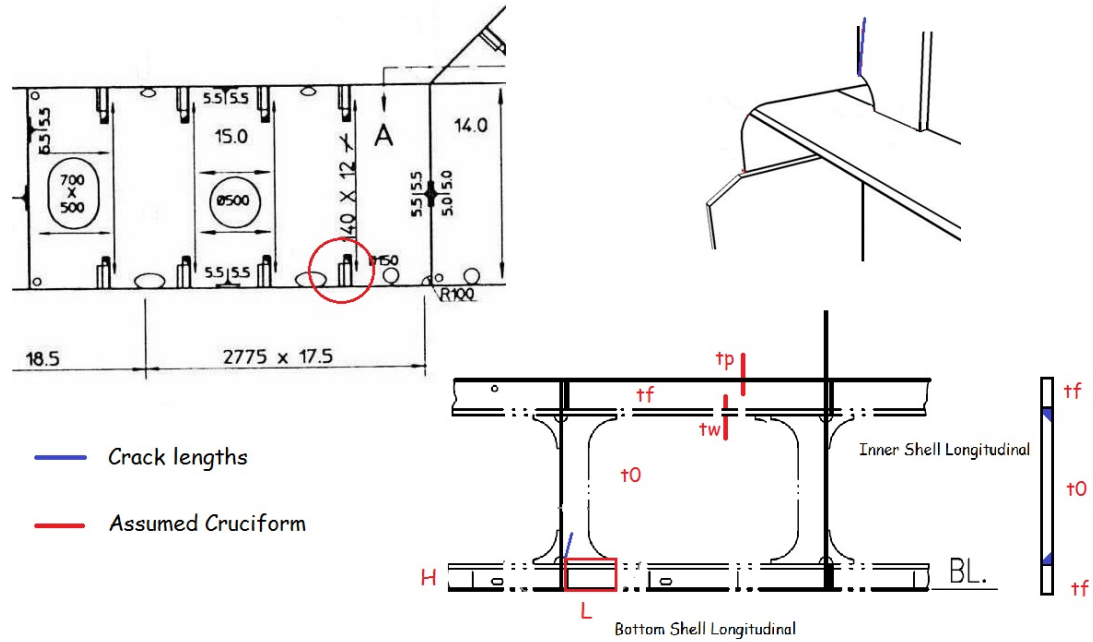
Situation II of cracks happen at bottom longitudinal brackets
